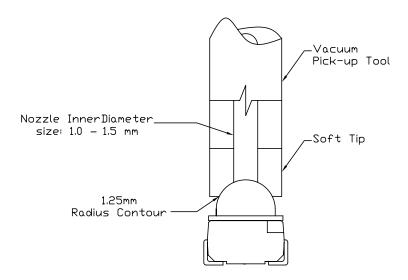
Soft Tip Vacuum Pick-up Tool for Extracting SMT LED Components from Carrier Tape.
